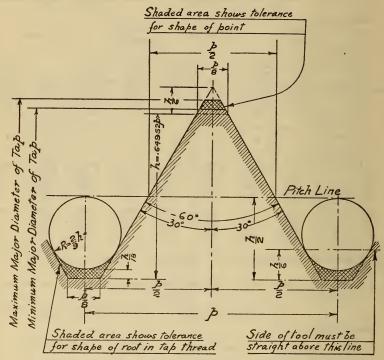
Shape for teeth of top or internal thread-chasing tool
